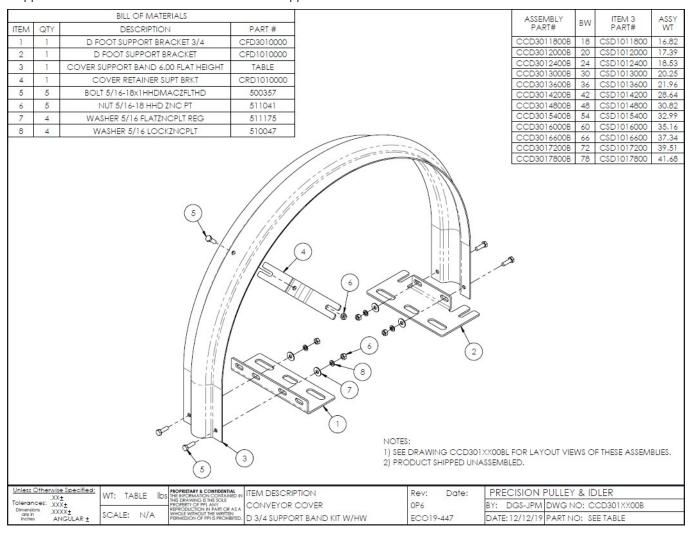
D 3/4 COVER SUPPORT BAND ASSEMBLY WITH LIST OF COMPONENTS
